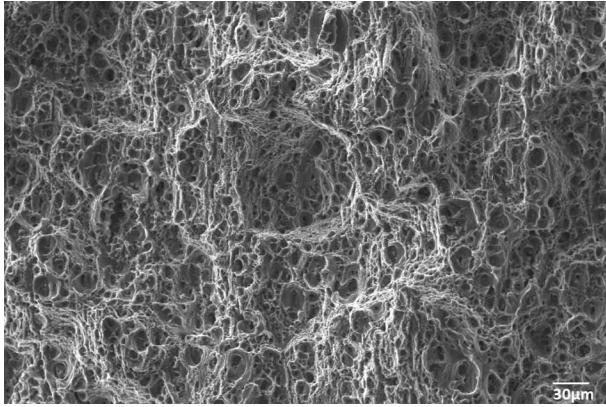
Fracture surface of a room temperature tensile-tested aluminum alloy AFNOR 7020-T6 (Al-4.5-Zn-1.5Mg) sheet. The specimen is at 45° to the rolling direction. Note fine dimples throughout the surface
